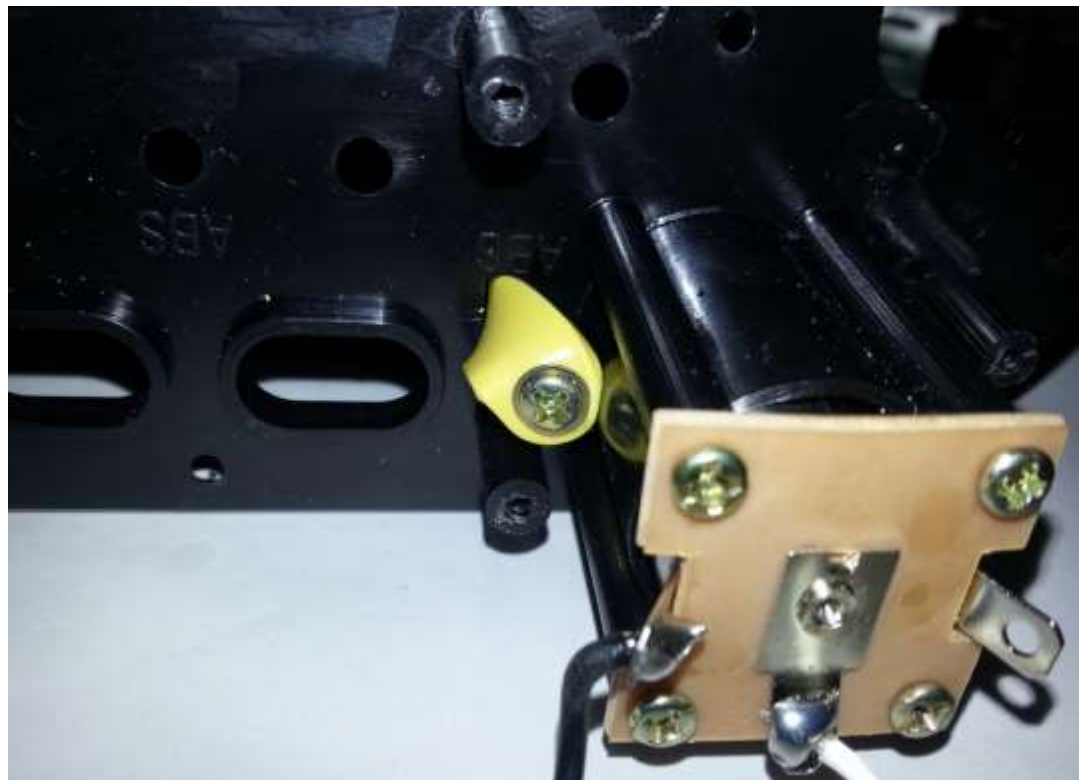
Fastening the DC outlet and outlet cover to the front panel
